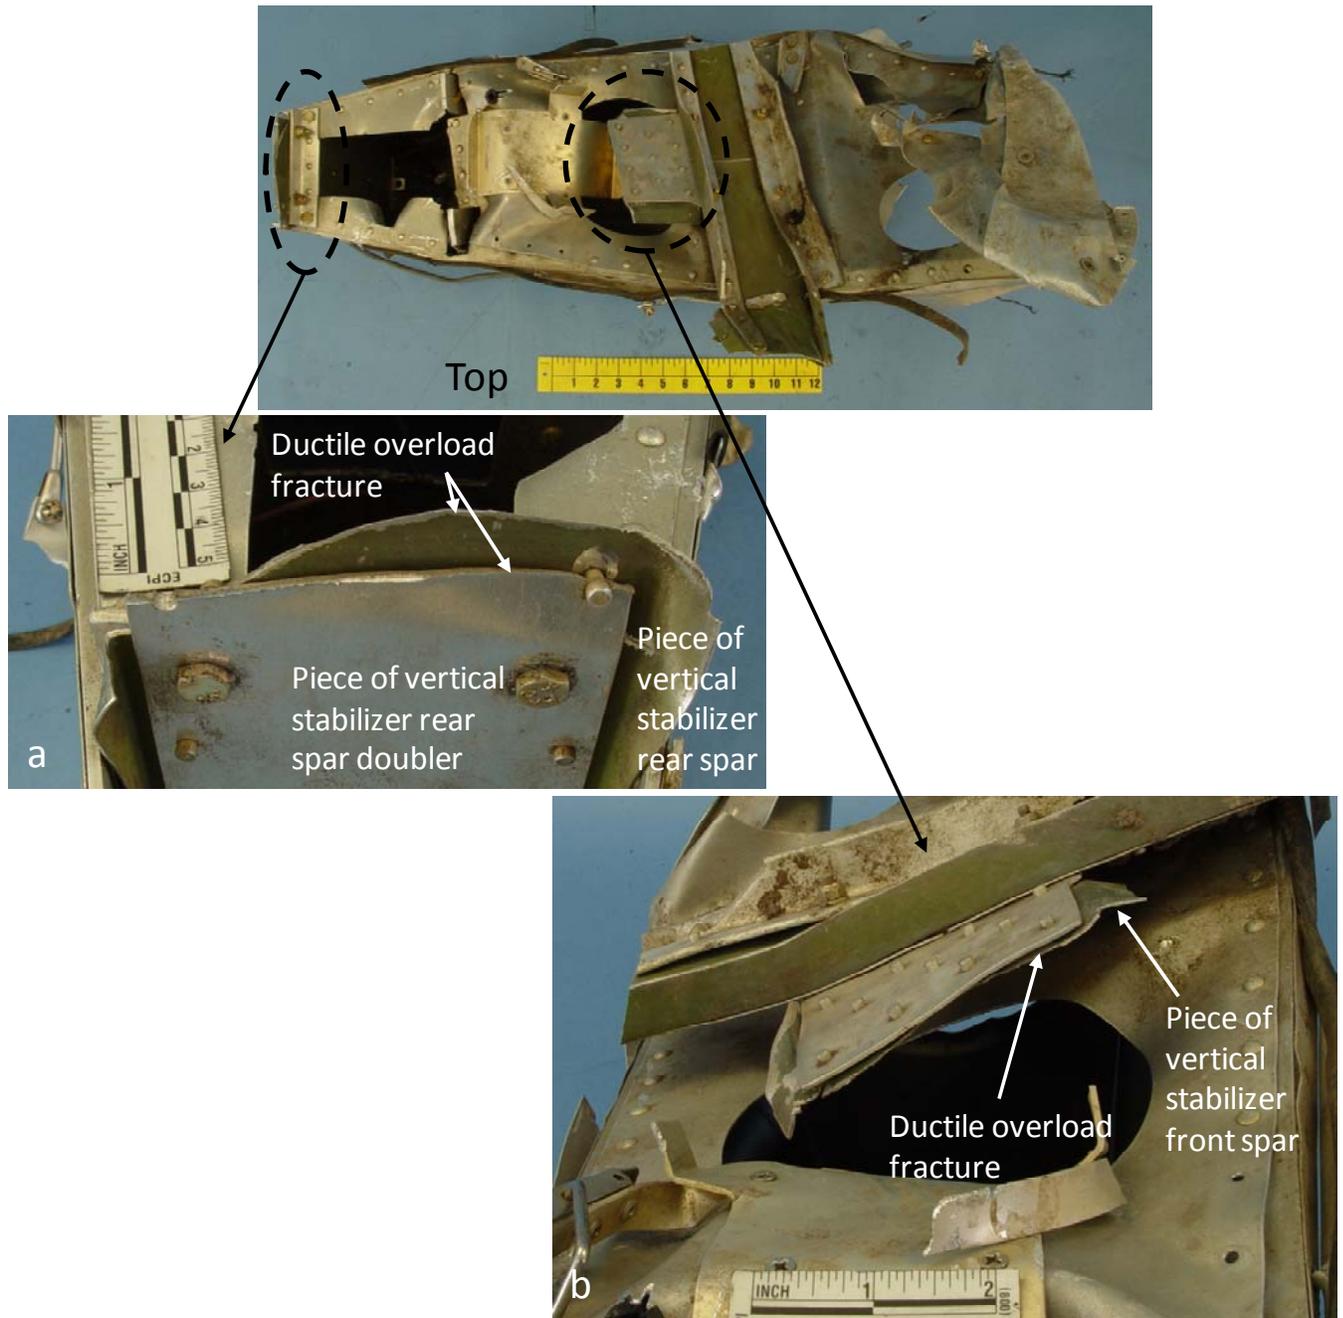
a) macrograph showing the ductile overload fracture surfaces of the rear spar and rear spar doubler for the vertical stabilizer. b) macrograph showing the ductile overload fracture surface of the front spar for the vertical stabilizer.
